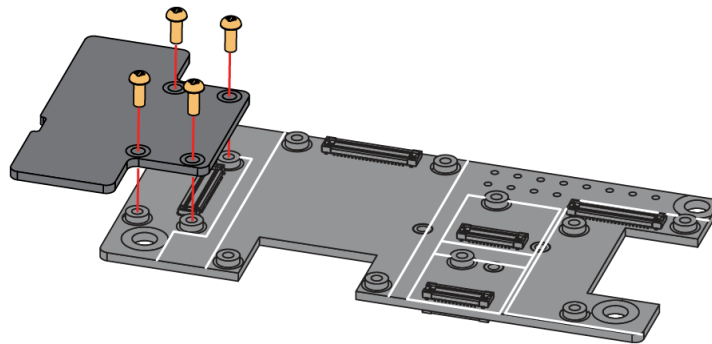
RAK19016 mounting mechanism on a WisBlock Base board with Power Slot
